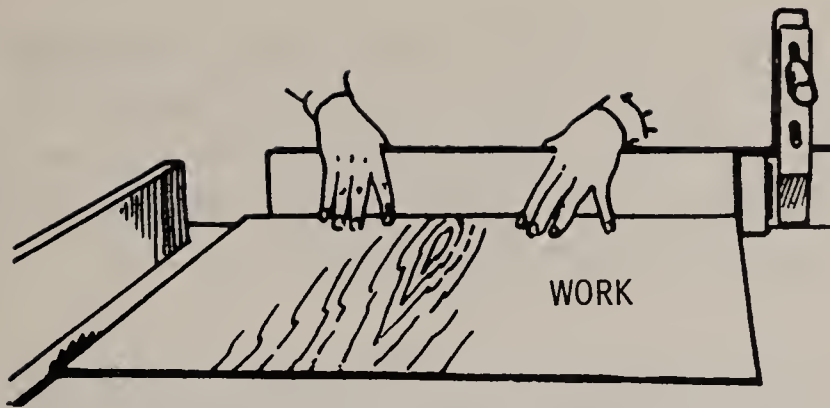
Squaring end of wide board held against stop block to prevent sliding. Guard is removed for purpose of illustration.
